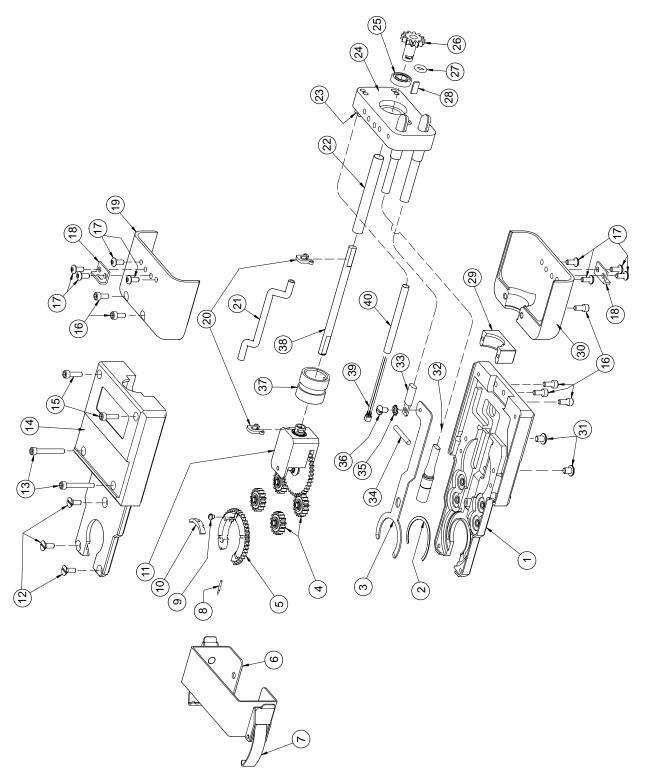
CWS-8MRH Rigid Micro Weld Head
